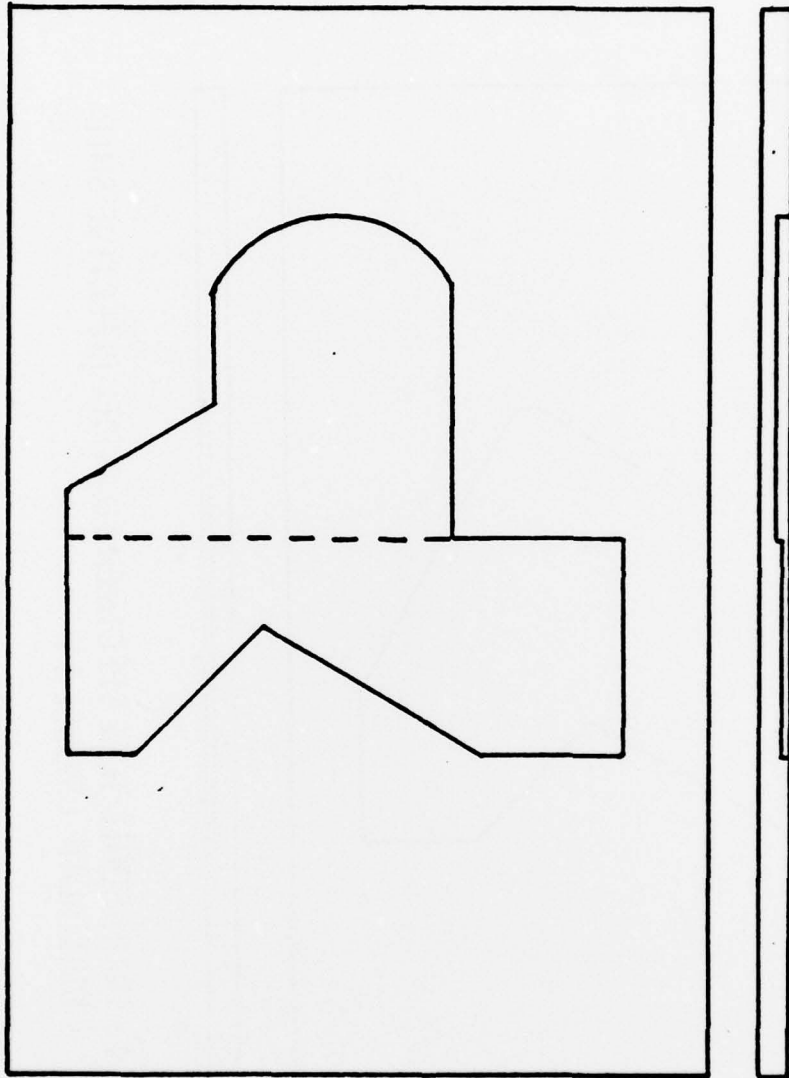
ULTRASONIC TEST SPECIMEN TO MODEL DEFECTIVE SHIP
